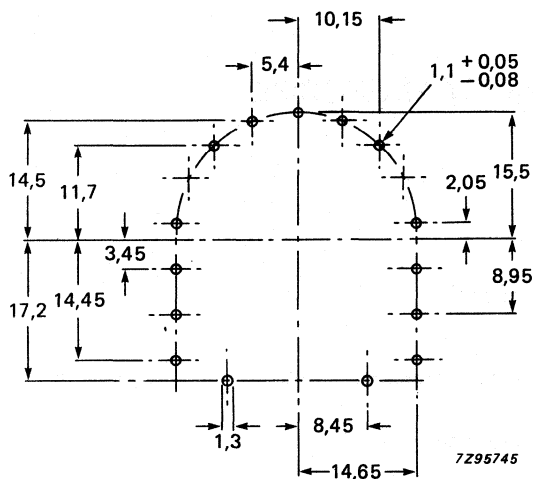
Hole pattern for mounting on a printed wiring board (solder side).
